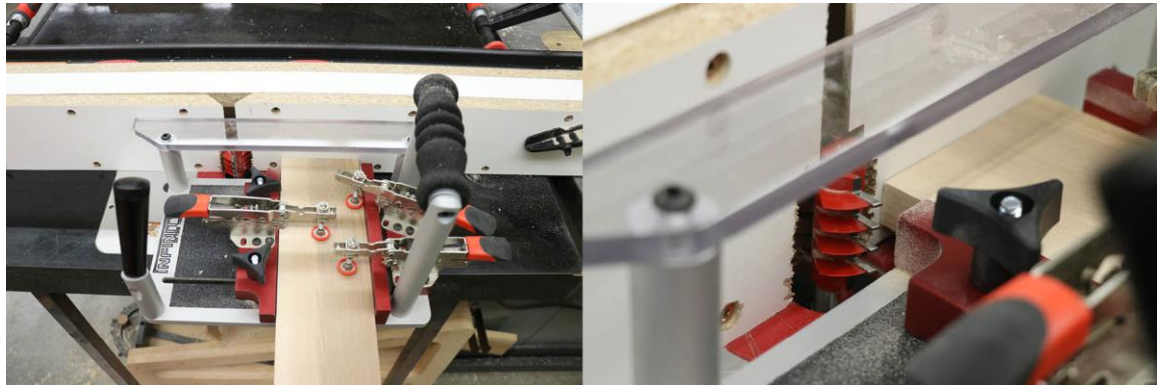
Wood pallet deck board clamped into coping sled for finger joint routing
